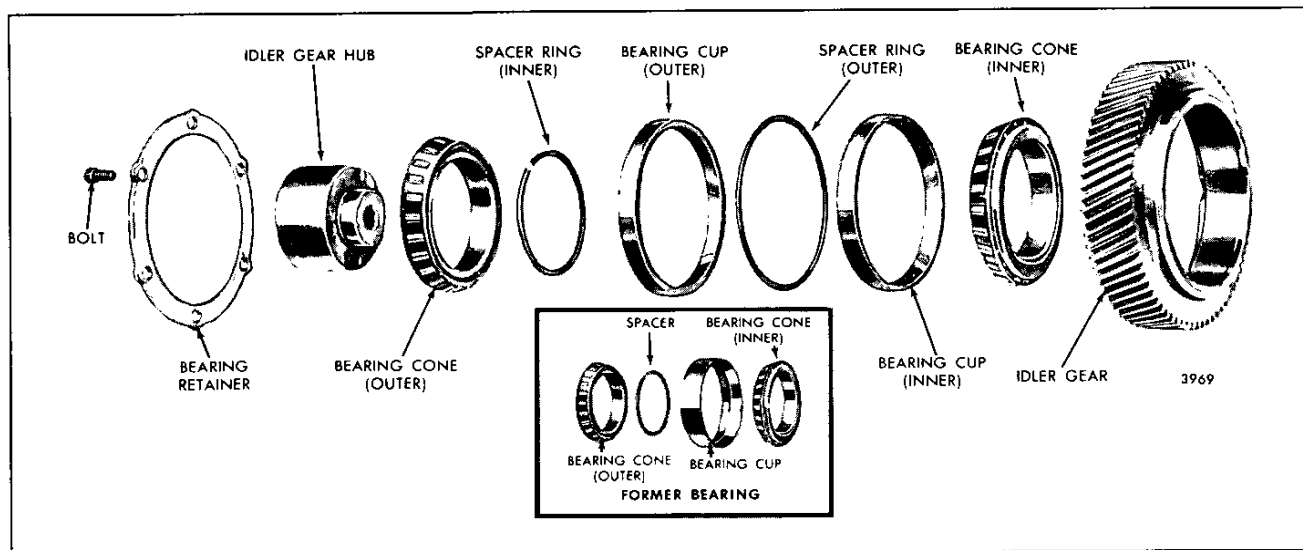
Idler Gear Details and Relative Location of Parts (Current Bearing)
